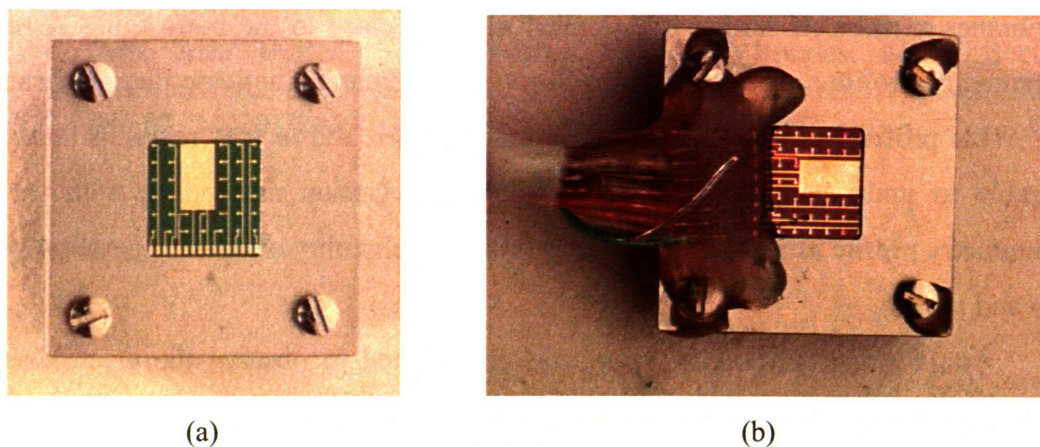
Photographs of (a) a packaged device and (b) a packaged device with electrical connection established by wire bonding through a connector board fixed on frame top using epoxy. Photos taken by Rebecca Shawgo.
